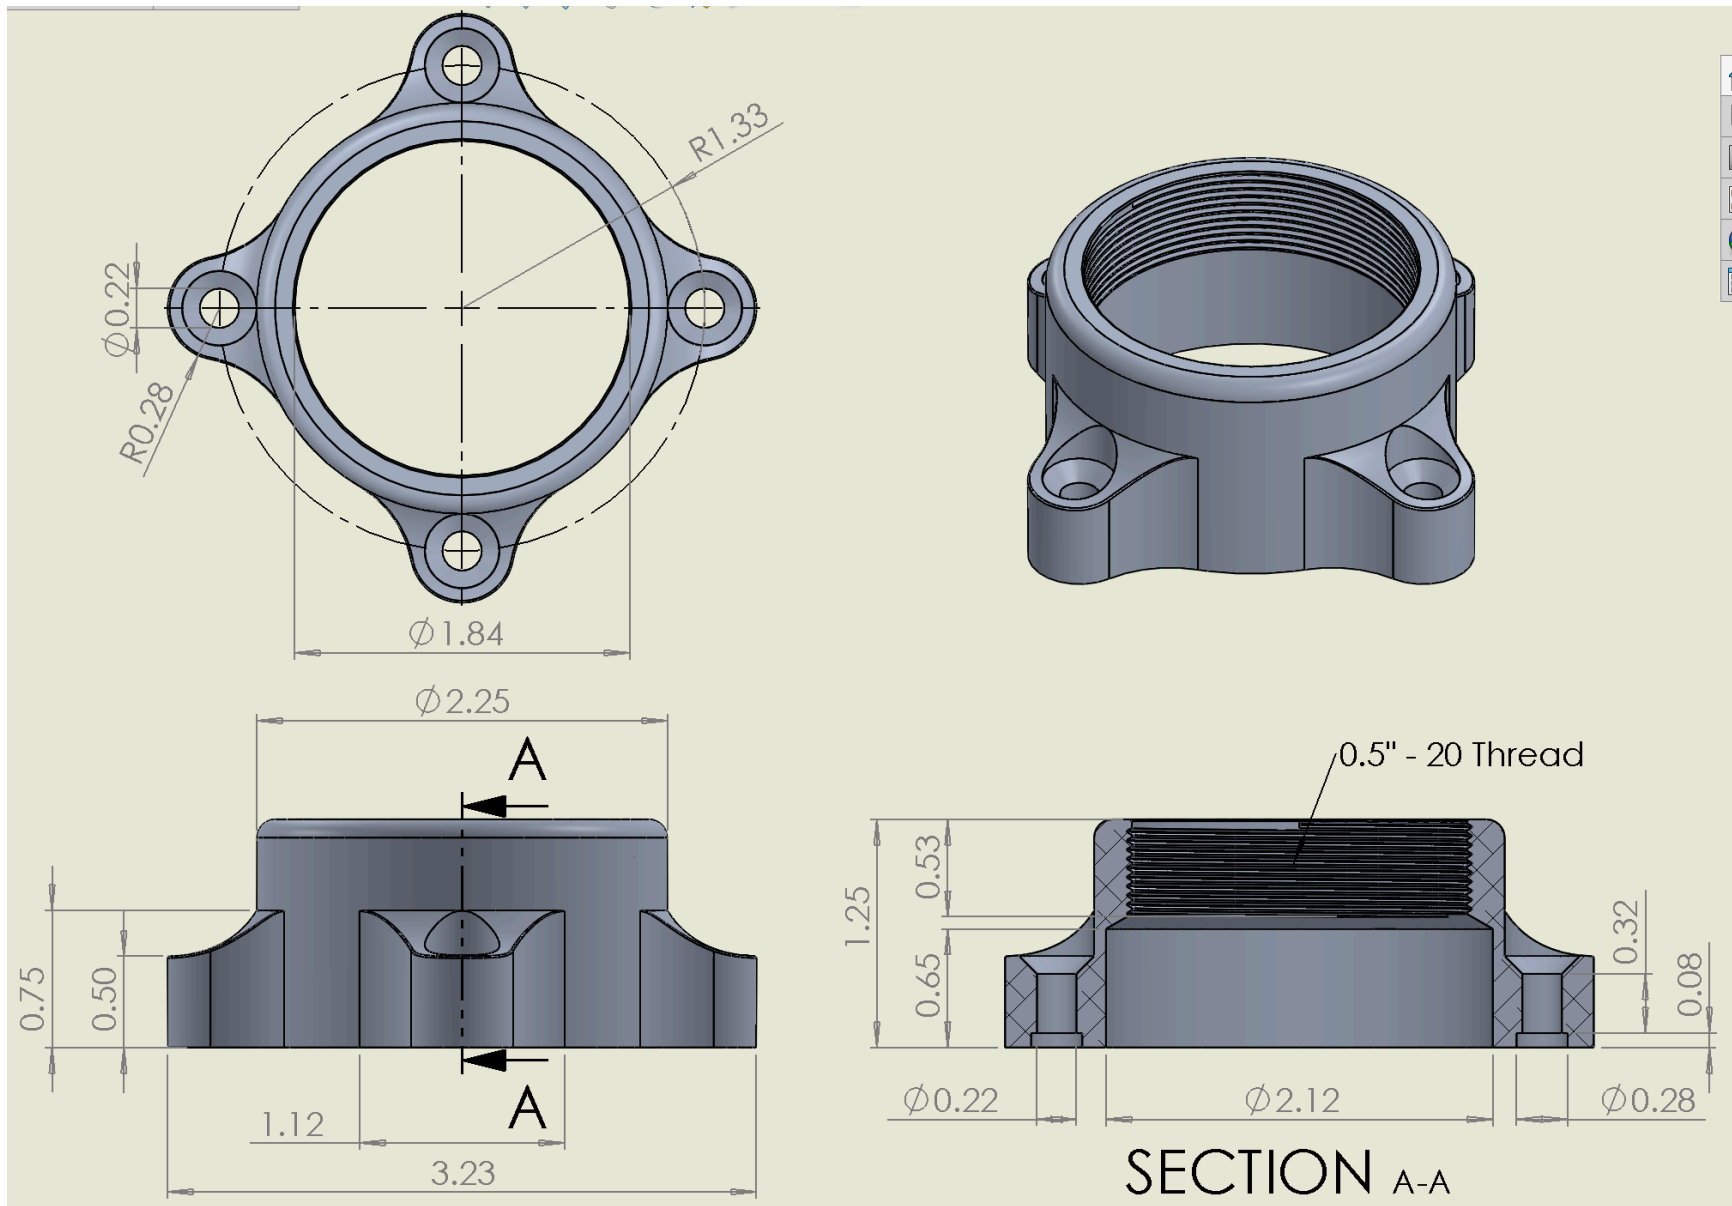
Ball Joint Housing Attachment Bracket Drawing
